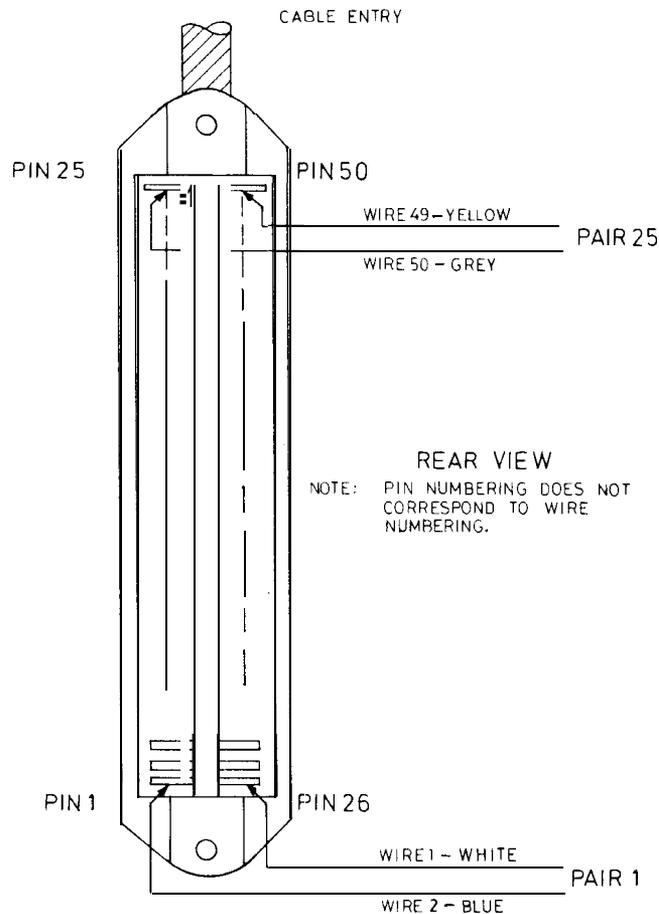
AMP CHAMP CONNECTOR -CABLE TERMINATION
